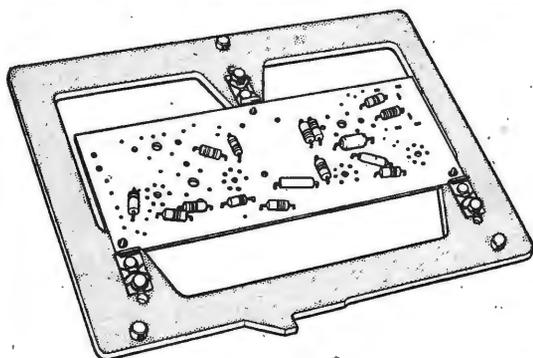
Conveyor pallet complete with printed-wiring board and assembled axial-lead components.
